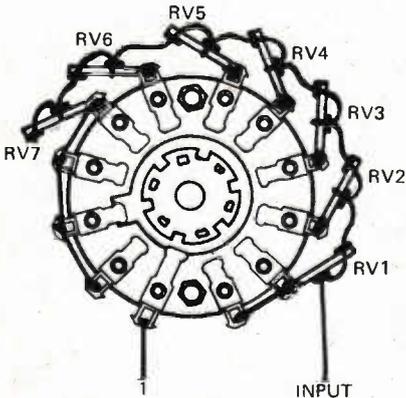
Method of wiring up oscillator switch SW1 bottom wafer.
